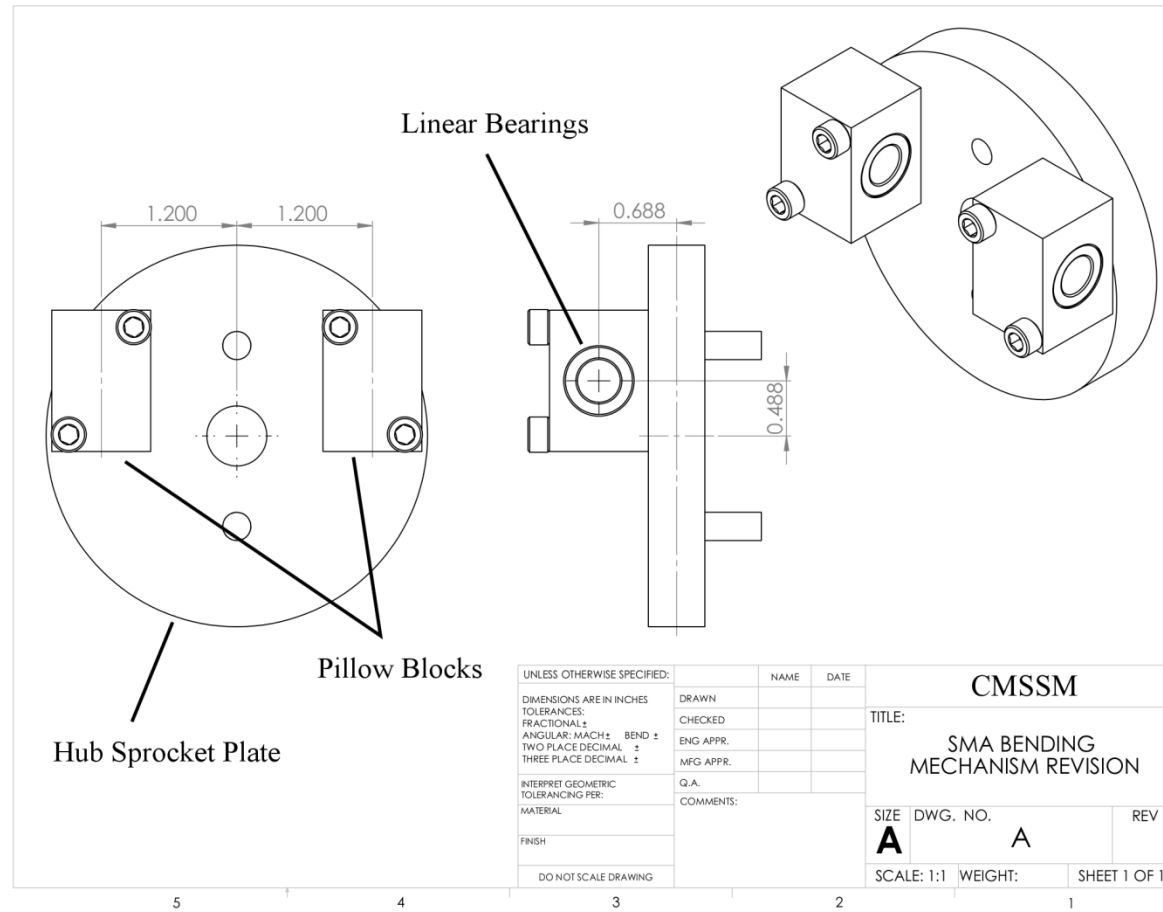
Drawing of the hub sprocket assembly with mounted pillow blocks housing the linear bearings through which the bending moment is applied to the specimen.
